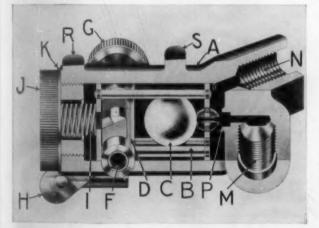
Hill Hold With Clutch Pedal Not Depressed
